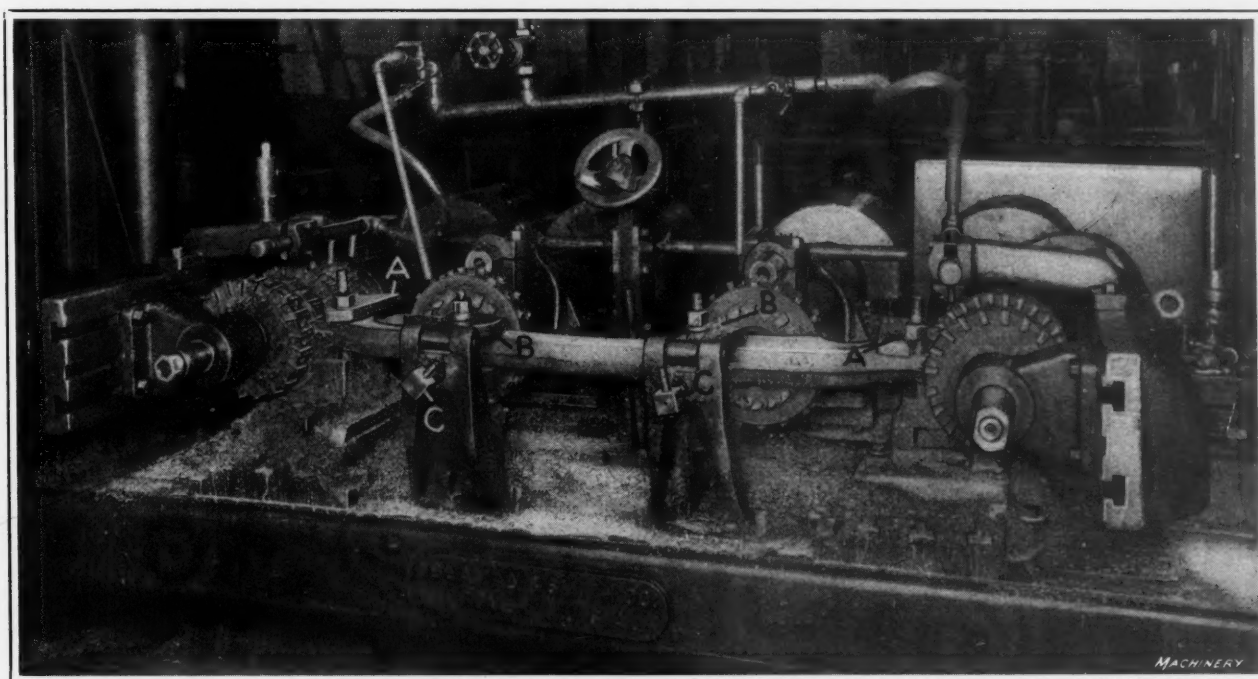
Special Multiple-spindle Milling Machine built for Use in simultaneously milling Ten Surfaces on Front Axle Forgings
